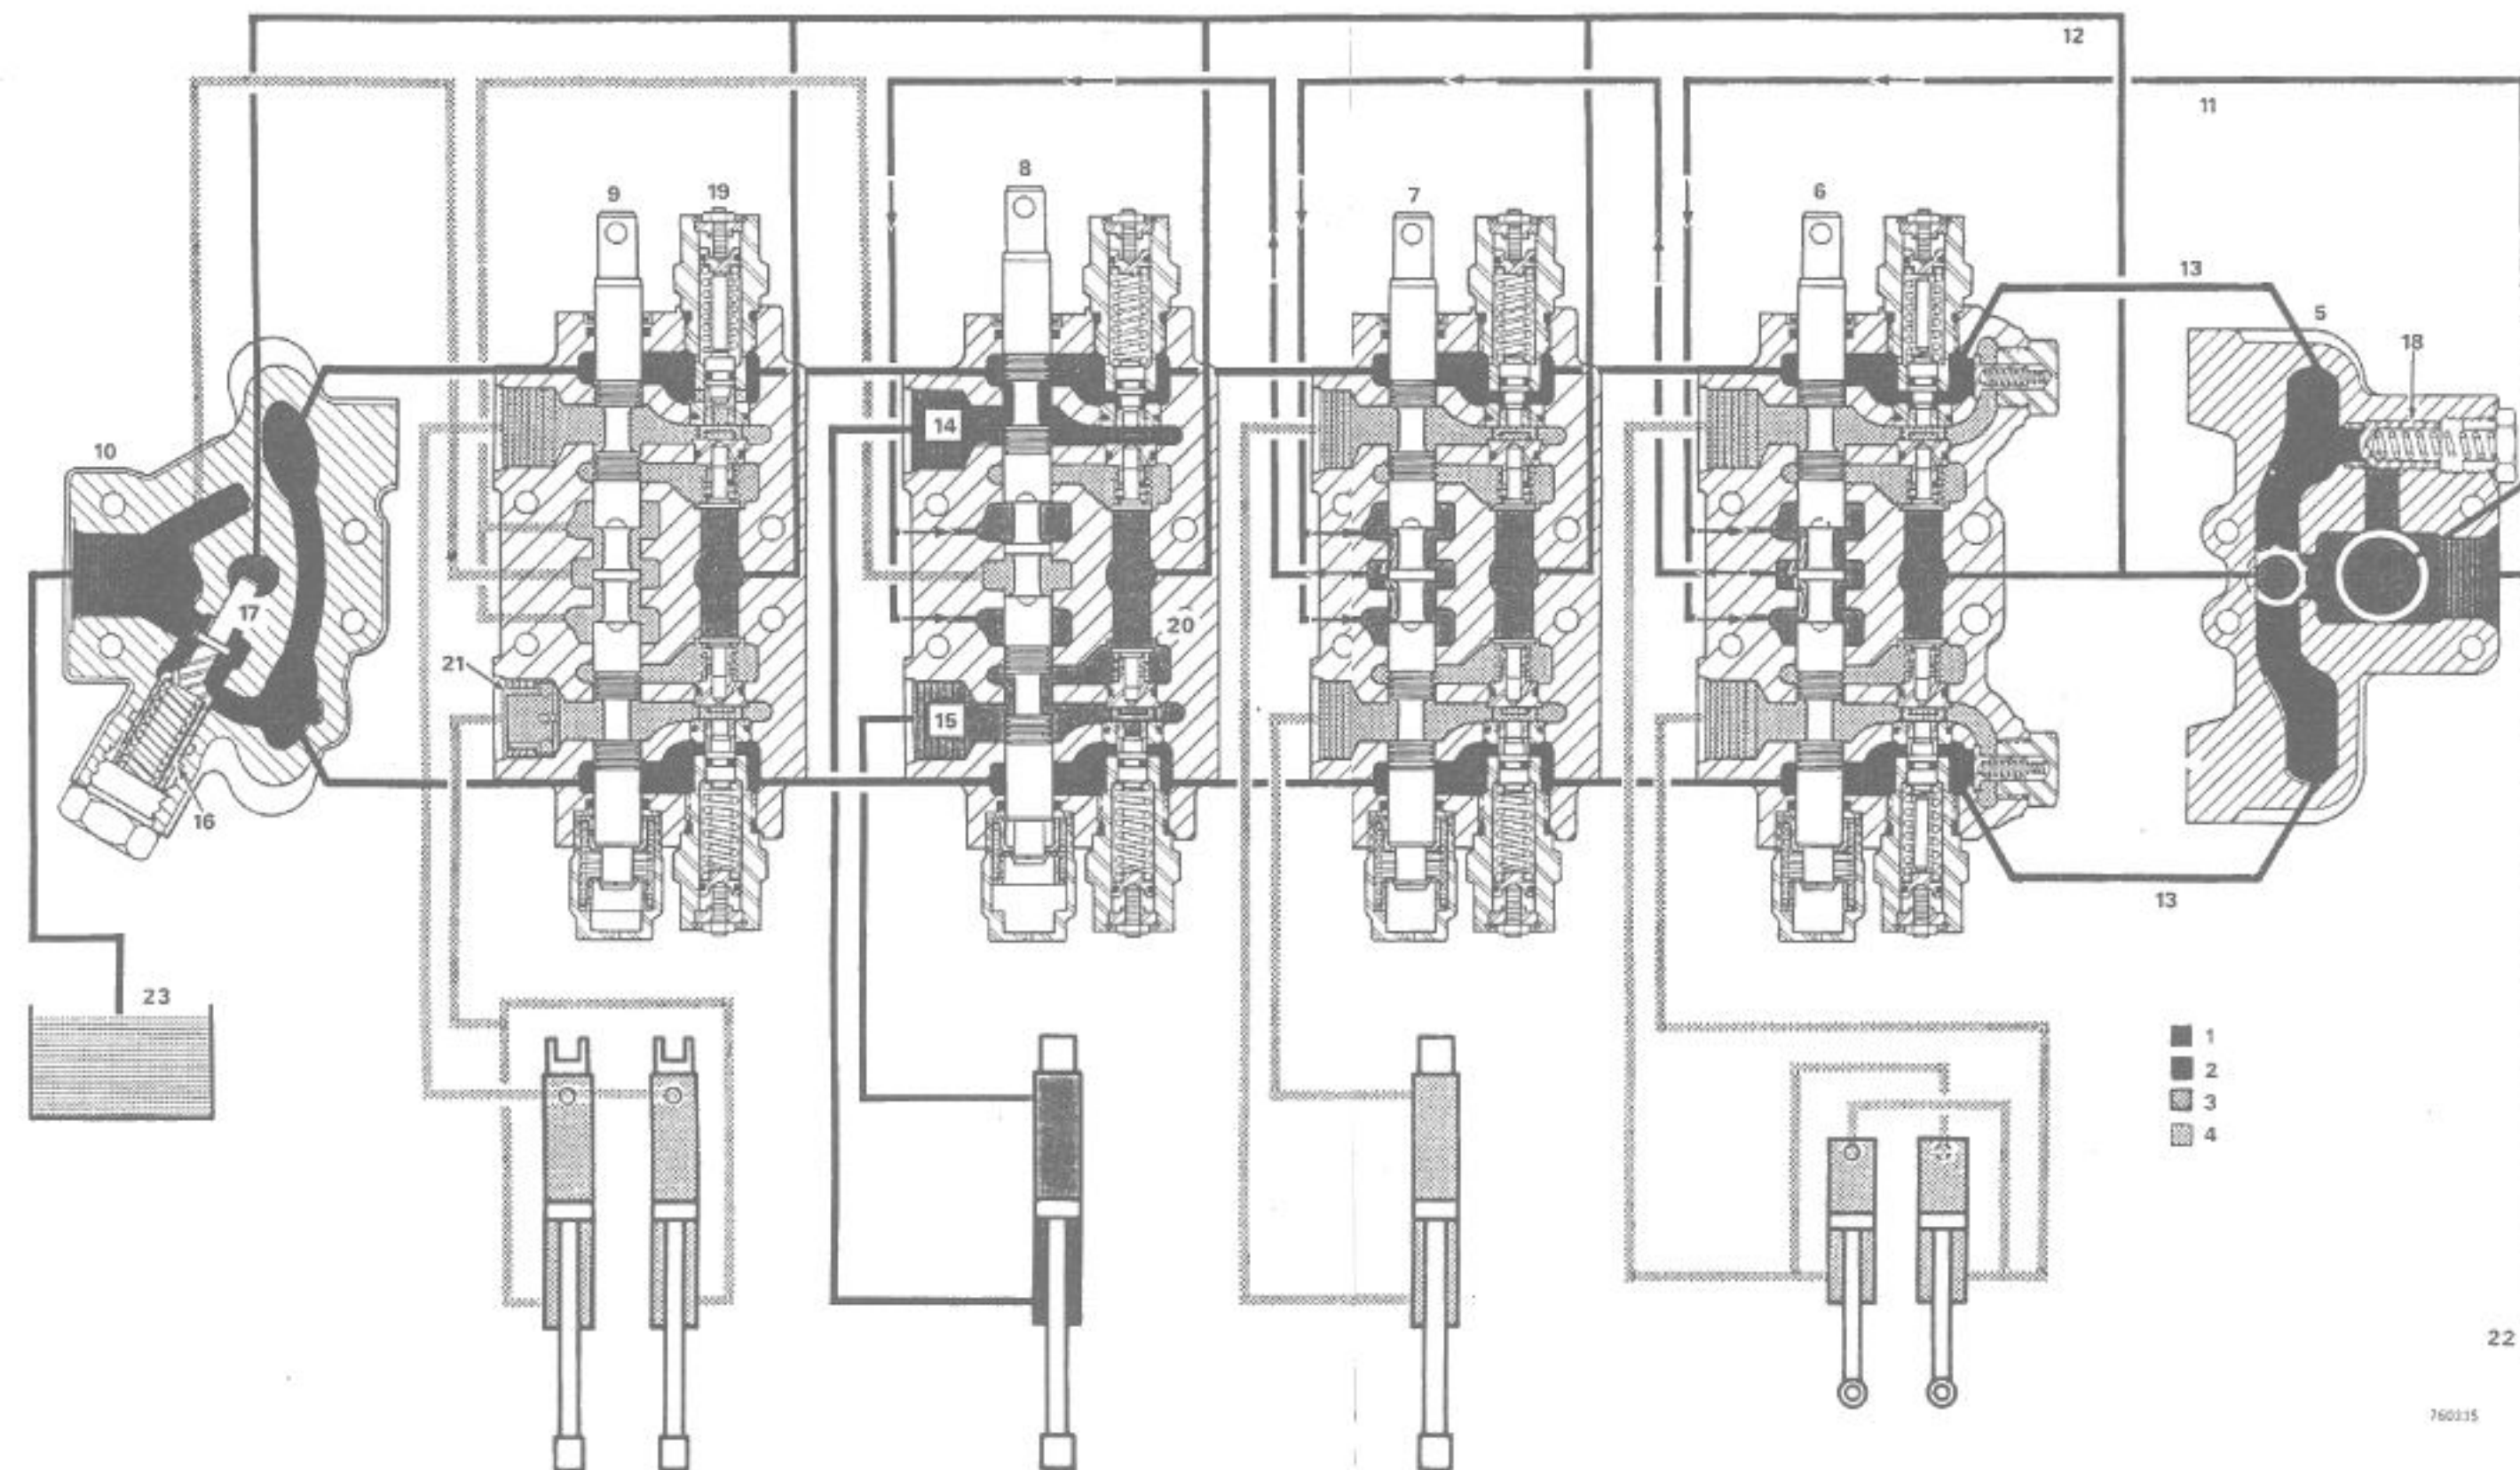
Oil Flow, Dipper Cylinder Extending, Boom Section Relief Valve Open
